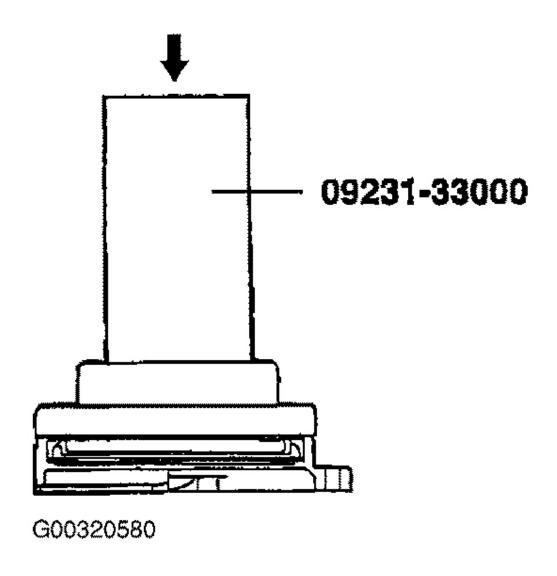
Positioning Rear Oil Seal Onto Special Tool Courtesy of KIA MOTORS AMERICA, INC.
